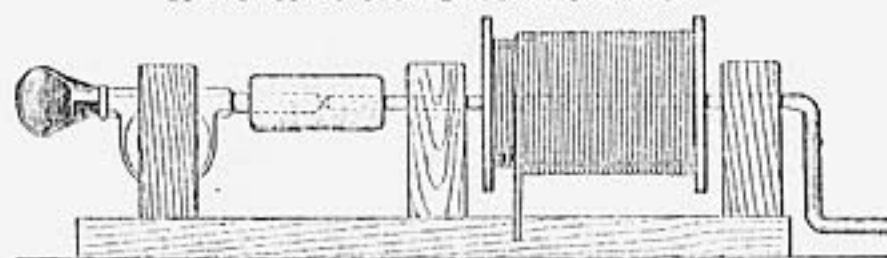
ATTACHED TO WOODEN WINDING JIG
